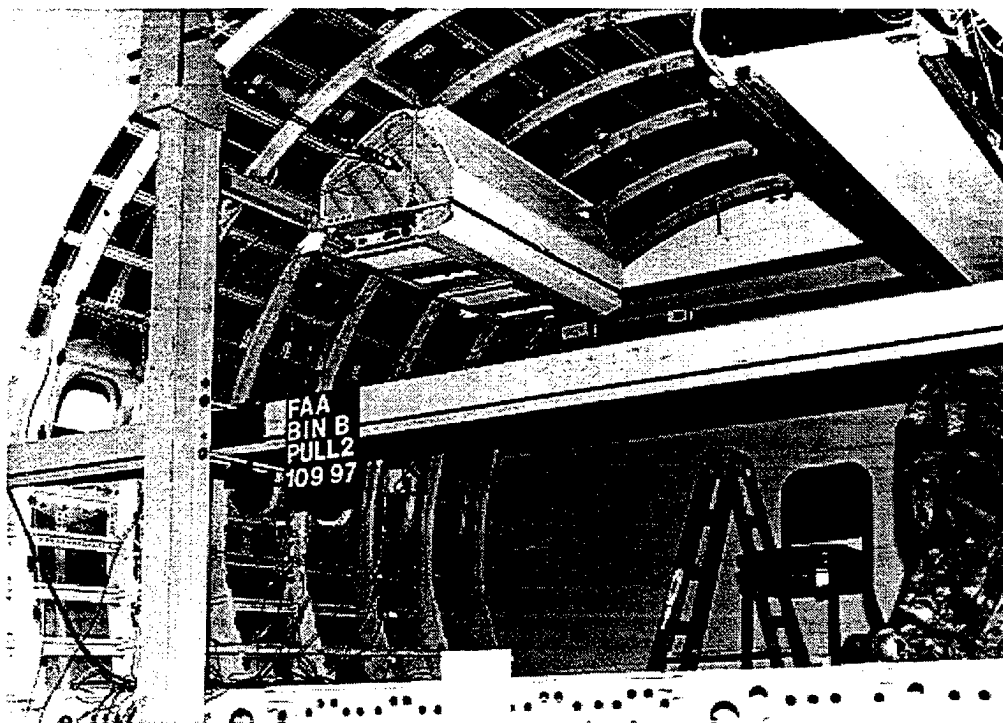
POSTTEST BIN B AND TEST FIXTURE FRONT ANGLE OVERALL VIEW
